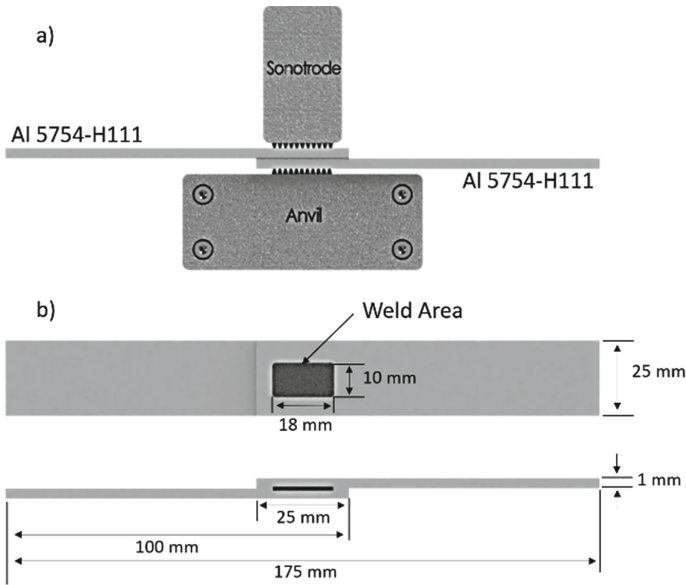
Schematic of (a) welding configuration and (b) welded specimens.
